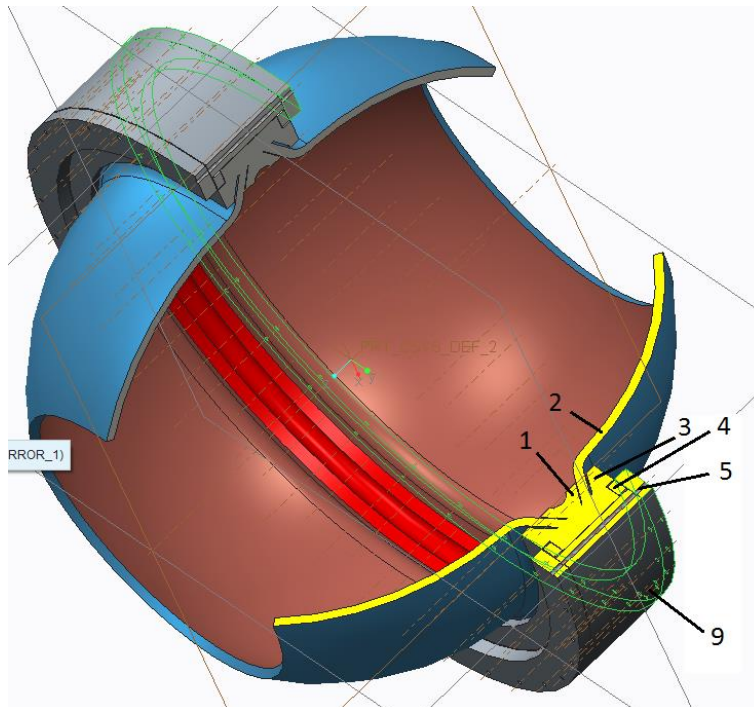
Assembled View of the Vessel, the Seals and the Holding Fixtures.
